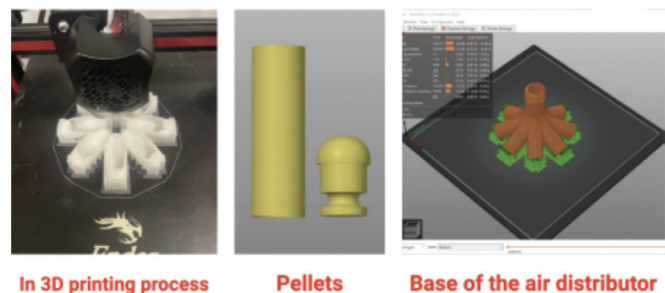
Process of 3D printing the prototype. Air distributor, pellets, and the base of the air distributor were created.
